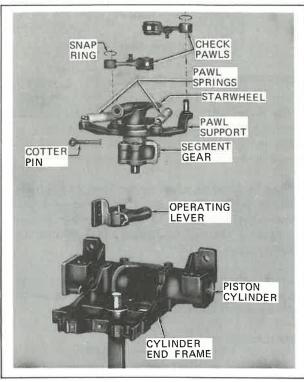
EXPLODED VIEW OF DRIVE MECHANISM PARTS.
